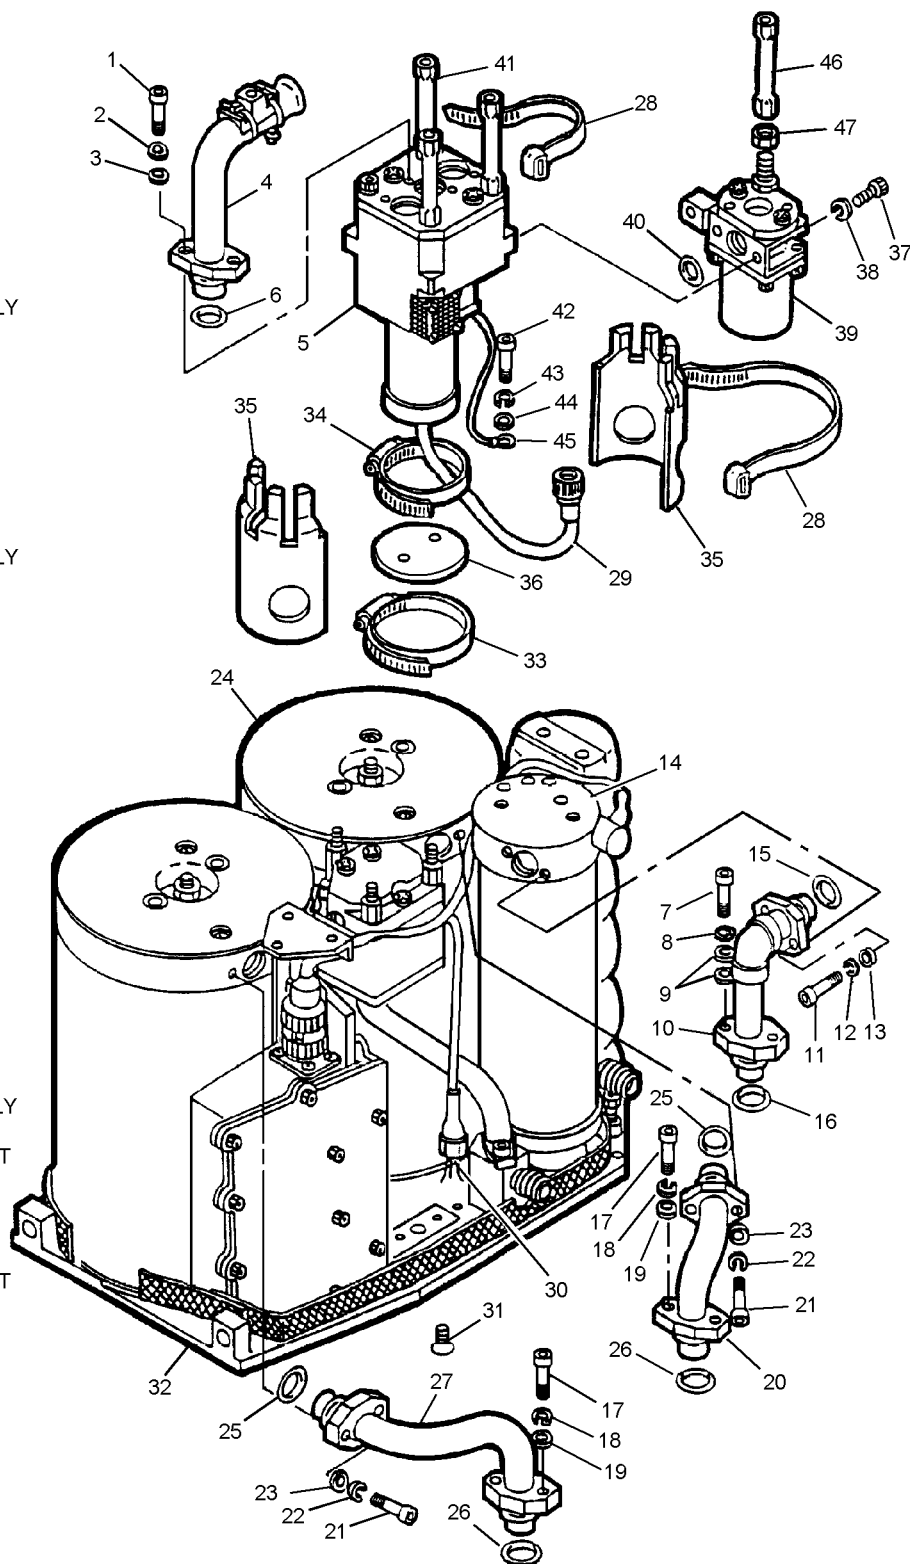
Rotary Valve Assembly/Pressure Reducer Assembly Removal/Assembly
